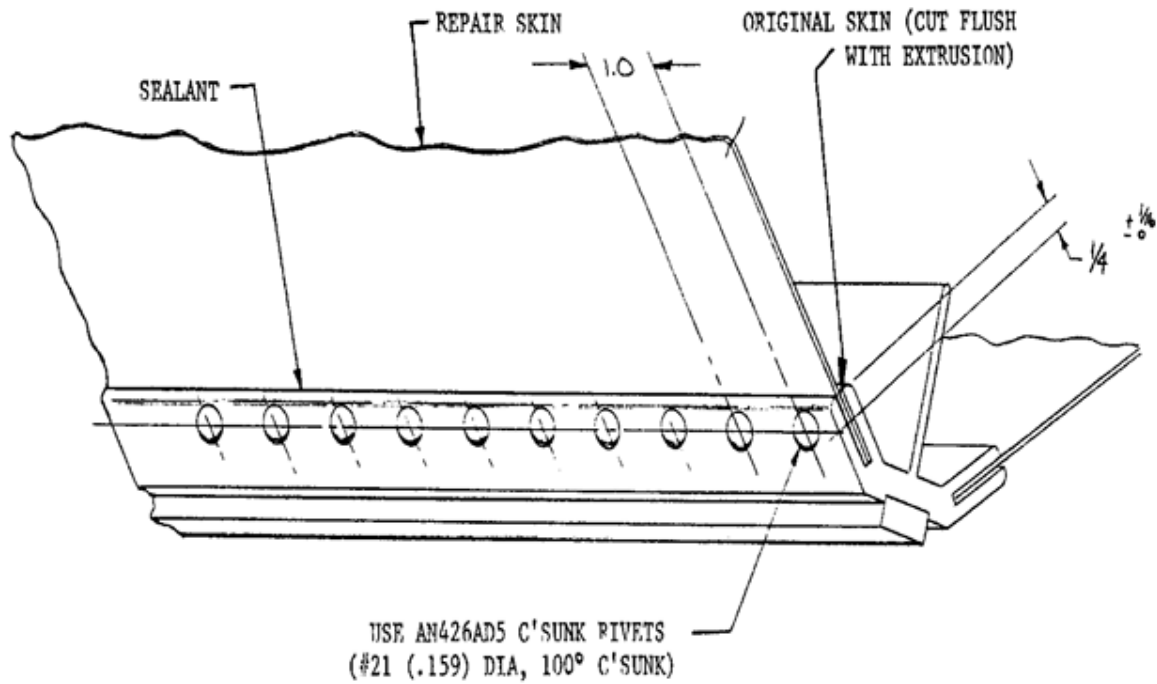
A: MODEL 3730/3900/4000/6000/6100/8000 TYPICAL REPAIR BOTTOM SKIN TO KEEL INSTRUCTIONS
